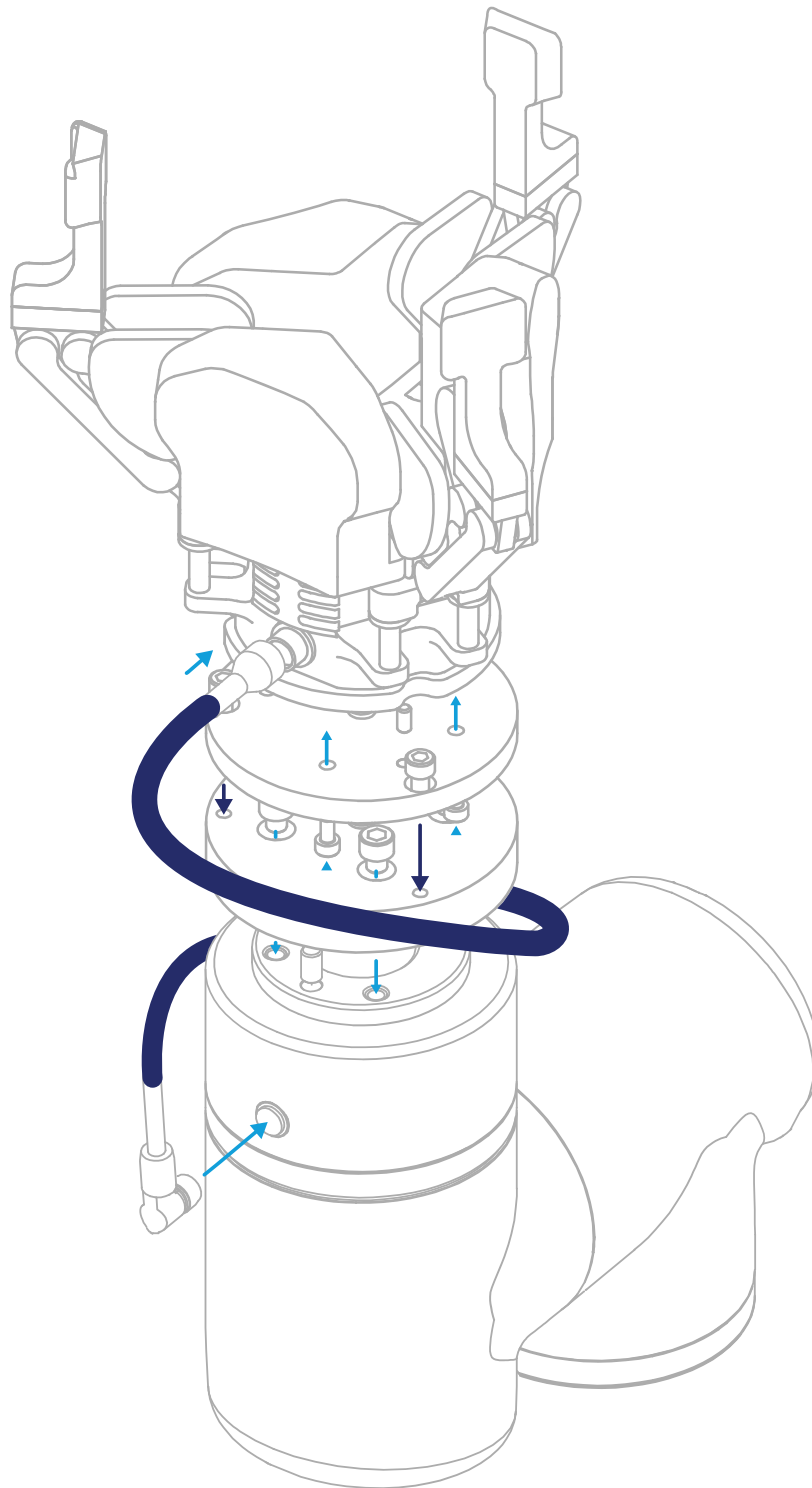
SusGrip Gripper Installation on Robot Arm with Additional Flanges
